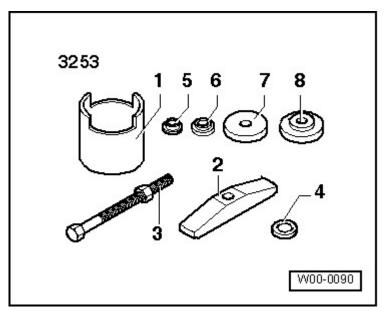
Assembly Tool 3253 Courtesy of AUDI OF AMERICA, LLC
